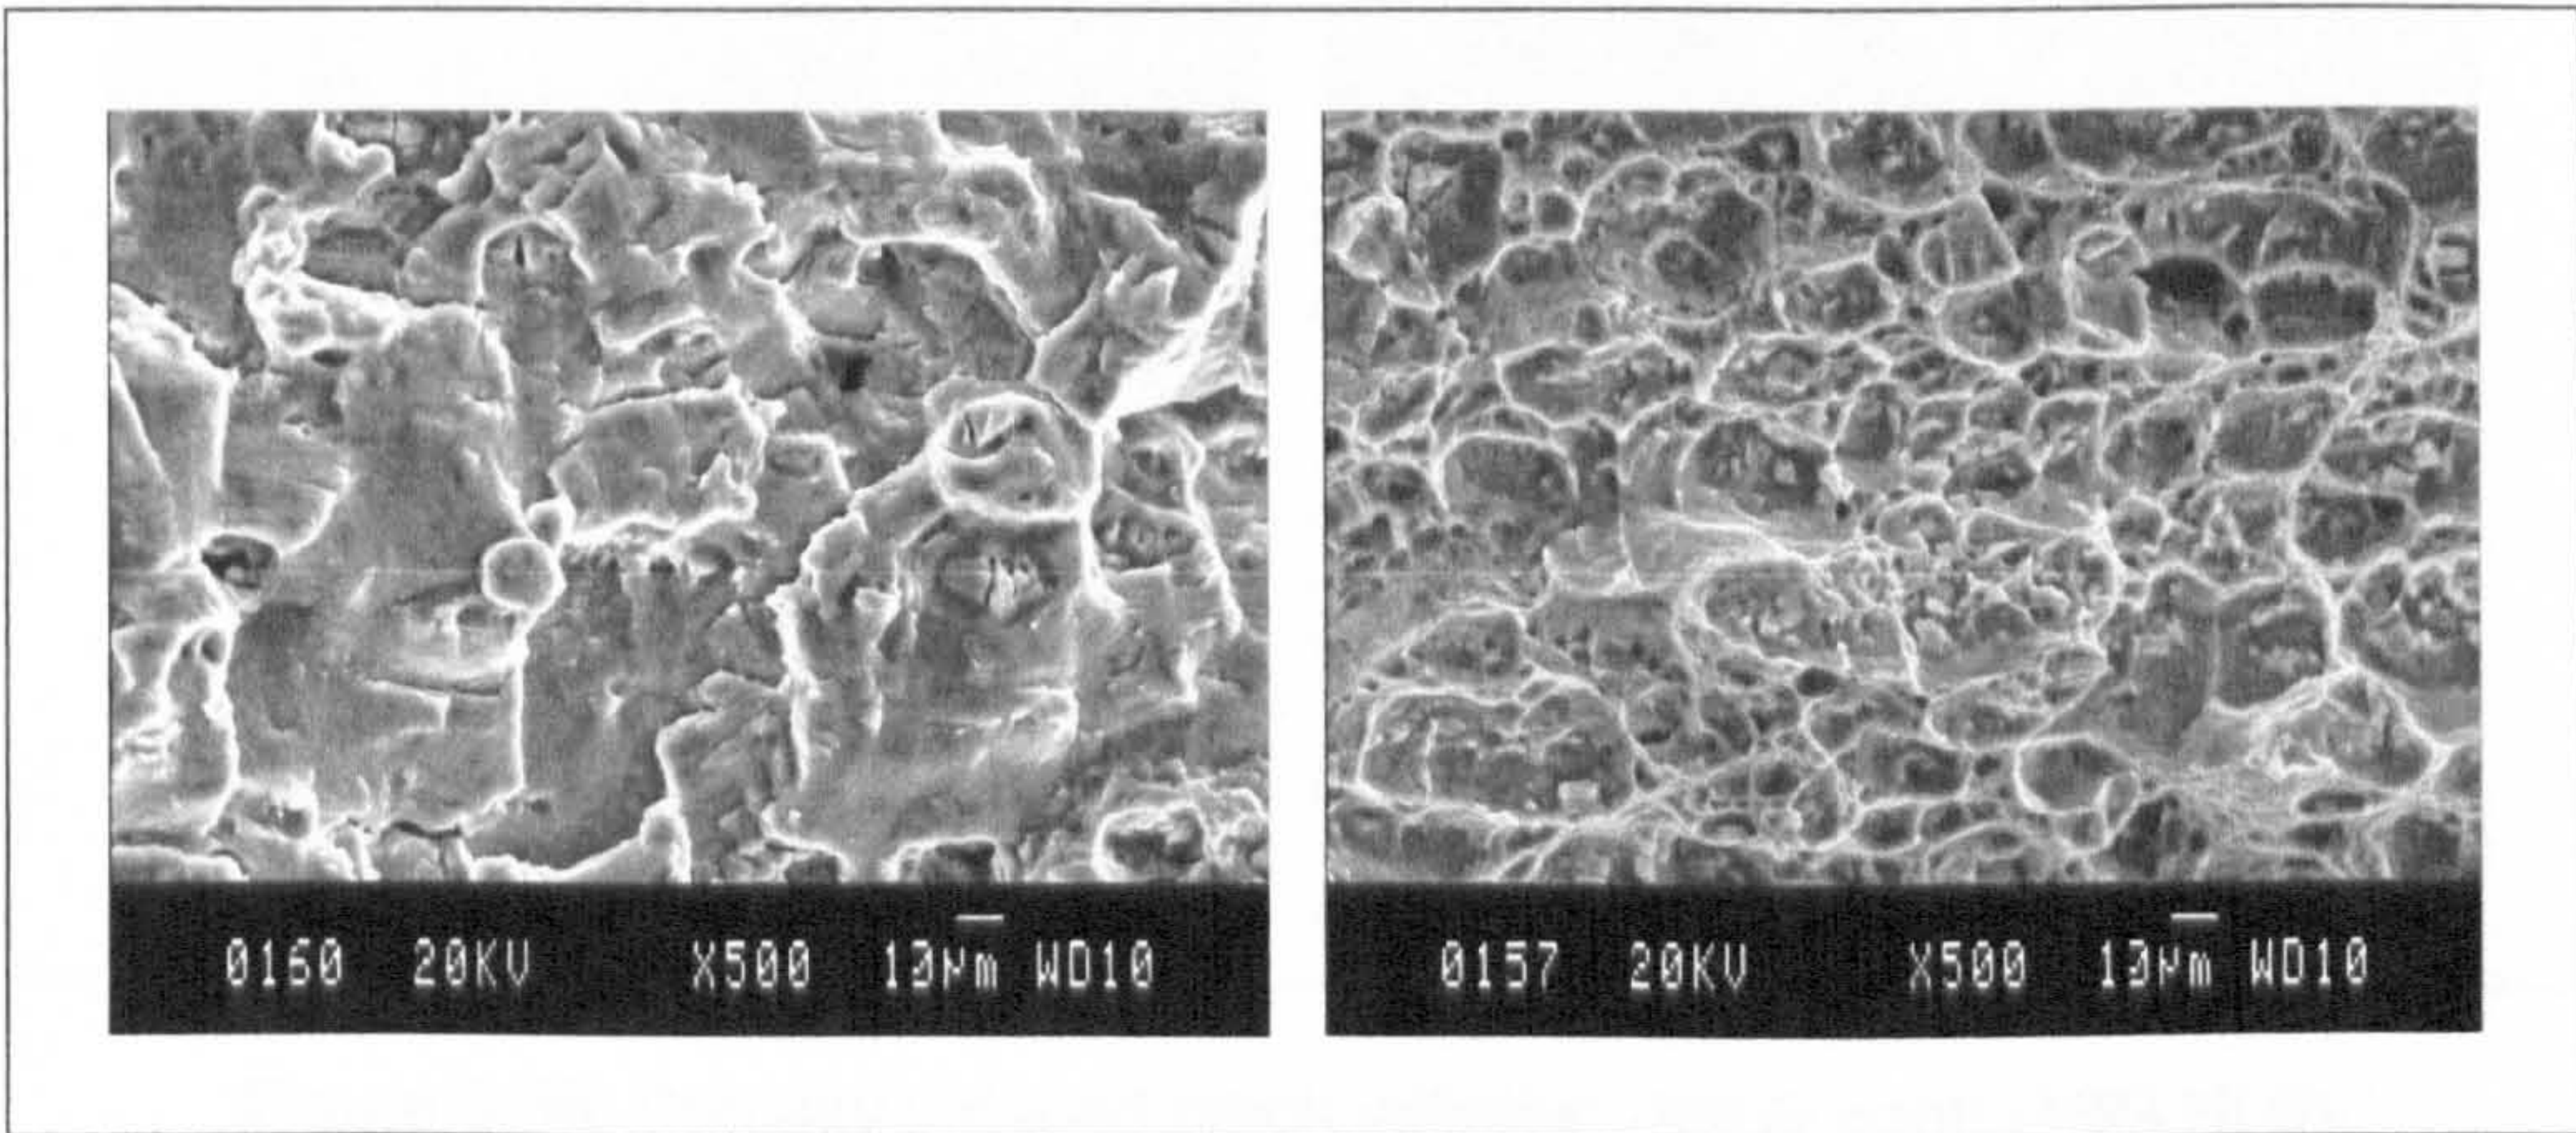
Fatigue crack fracture surface (left), fast fracture surface exhibiting microvoid coalescence (right) (MIG HI 2).
